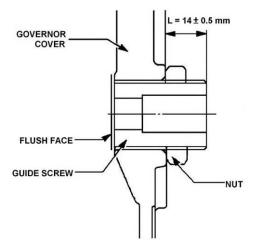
Adjustment of the Governor Shaft Guide Screw - Sectional View
